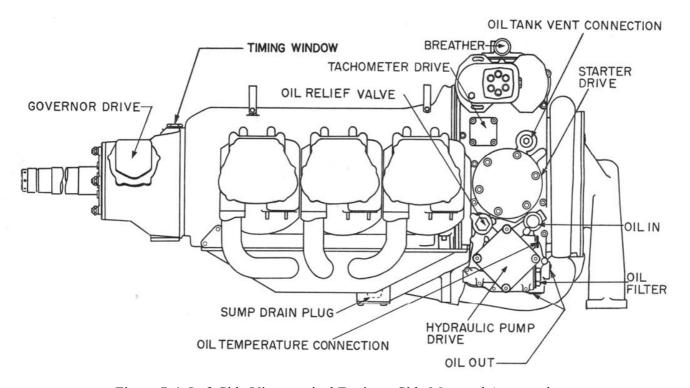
Left Side View, typical Engine – Side Mounted Accessories
